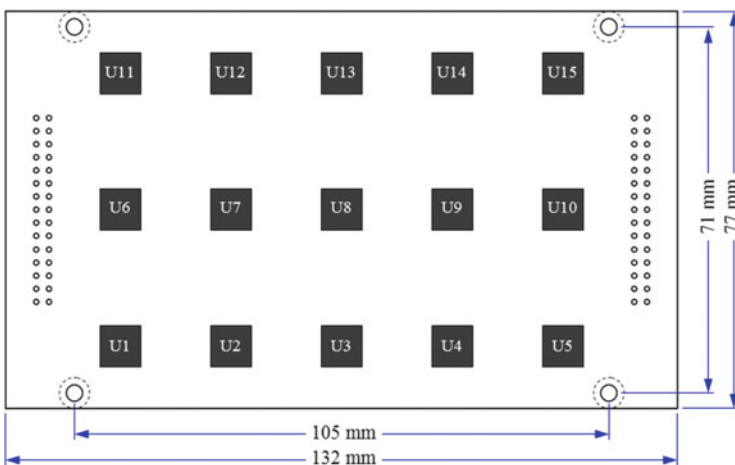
JEDEC drop PCB with 15 components mounted on
